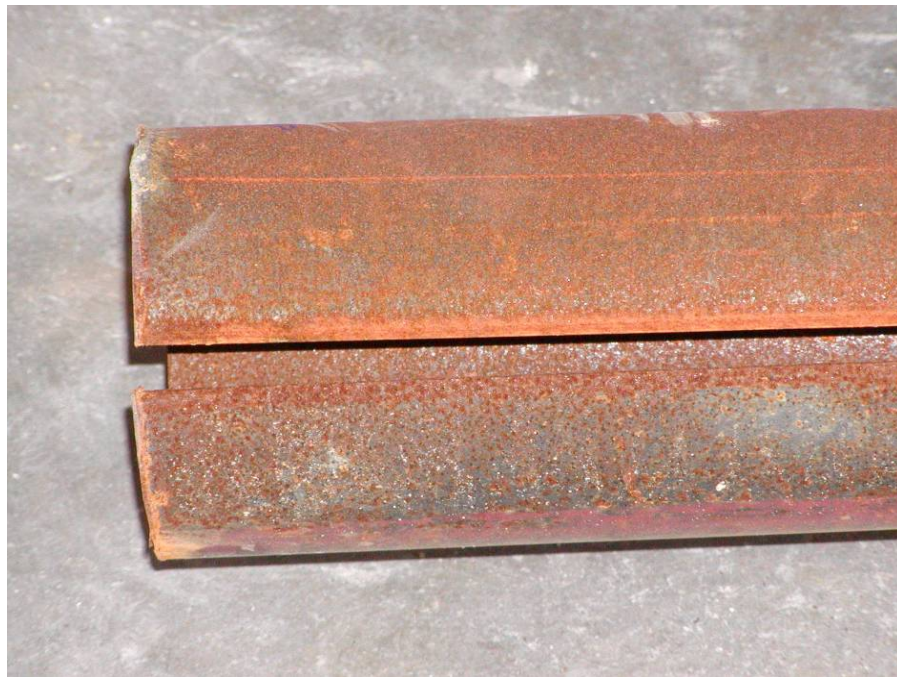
Pipe That Has Not Been Welded Shut
